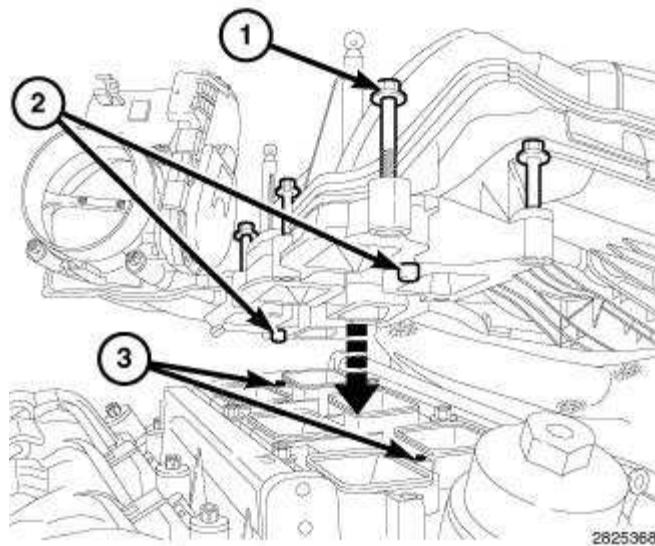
Upper Intake Attaching Bolts, Locating Posts & Holes
